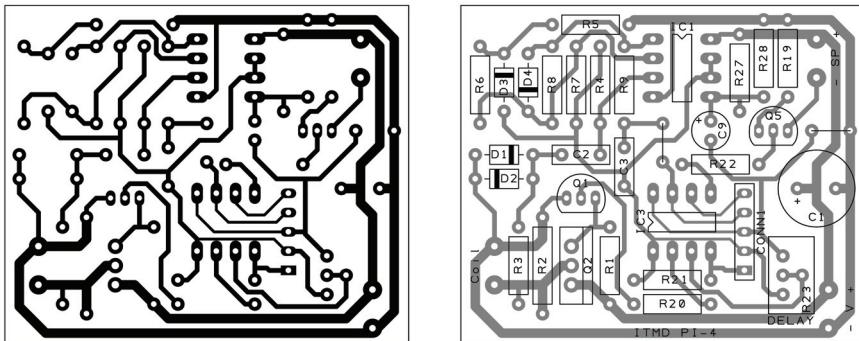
PI-4 PCB Layout & Parts Placement
